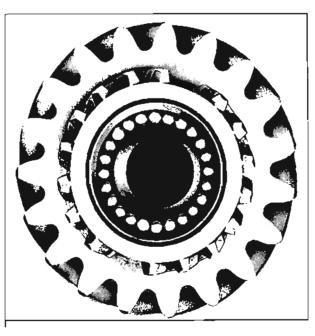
Mainshaft Pifot Roller Bearings in Clutch Gear
